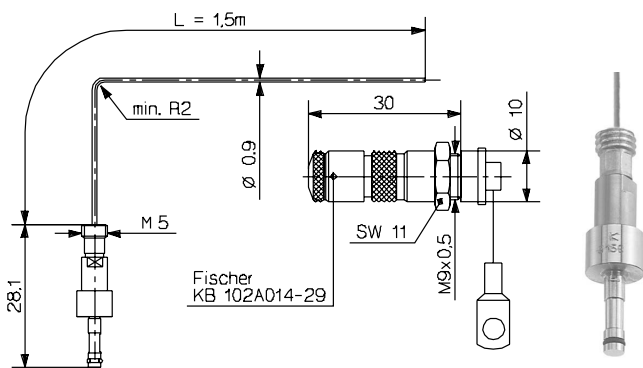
Alternative version of sensor Type 6159A... with single-wire technique.
